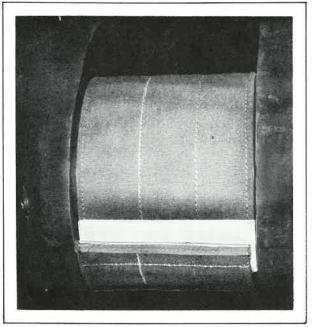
PROTECTIVE PAD ON ROD JOURNAL.
